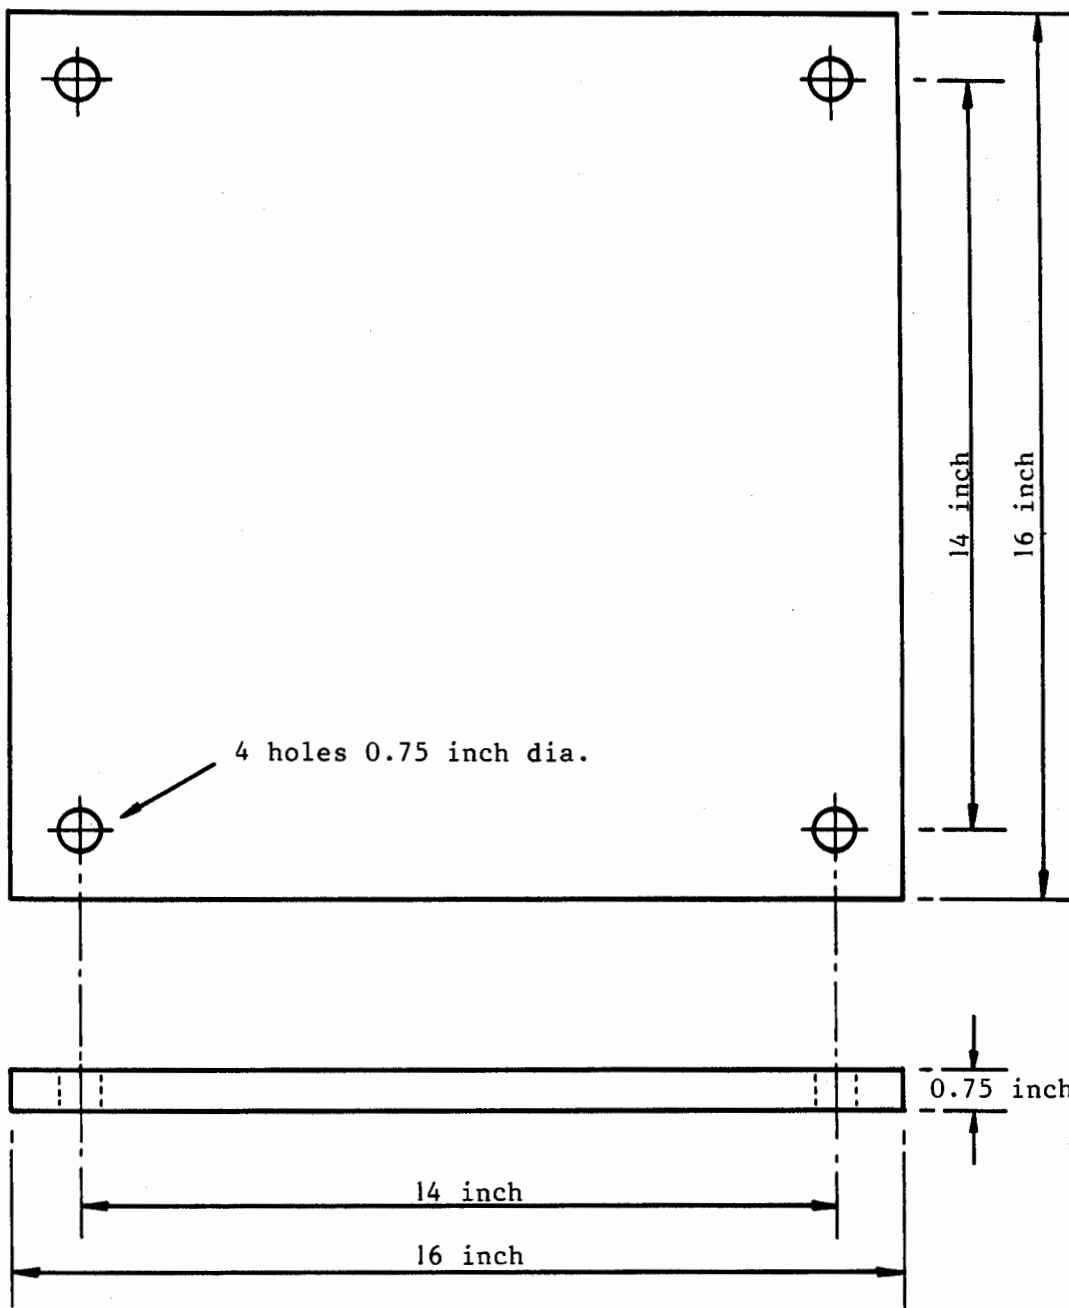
DIMENSIONAL DETAILS OF THE PERMANENT TOP AND BOTTOM END PLATES
